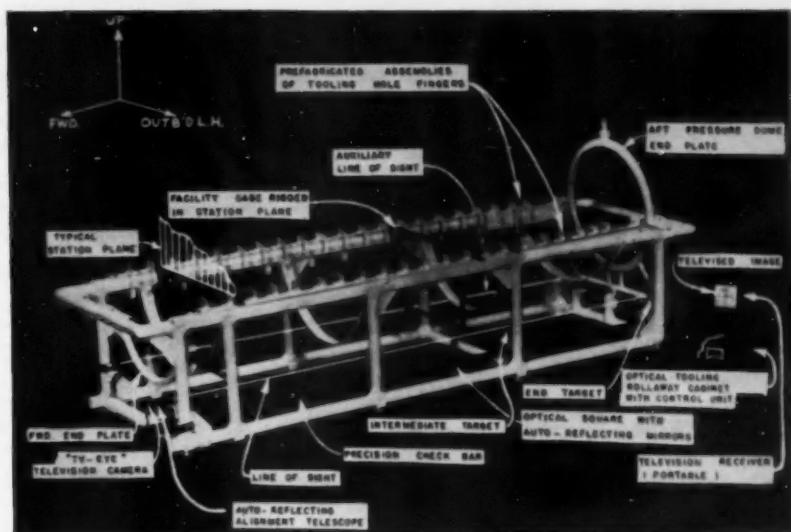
DC7C aft lower half fuselage assembly jig rigged by optical tooling methods with television observer
